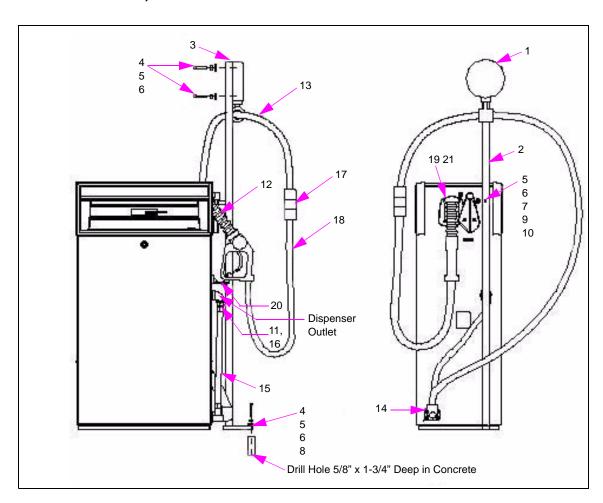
Hose and Retriever Assembly and Parts Identification (Electronic Model Shown)
